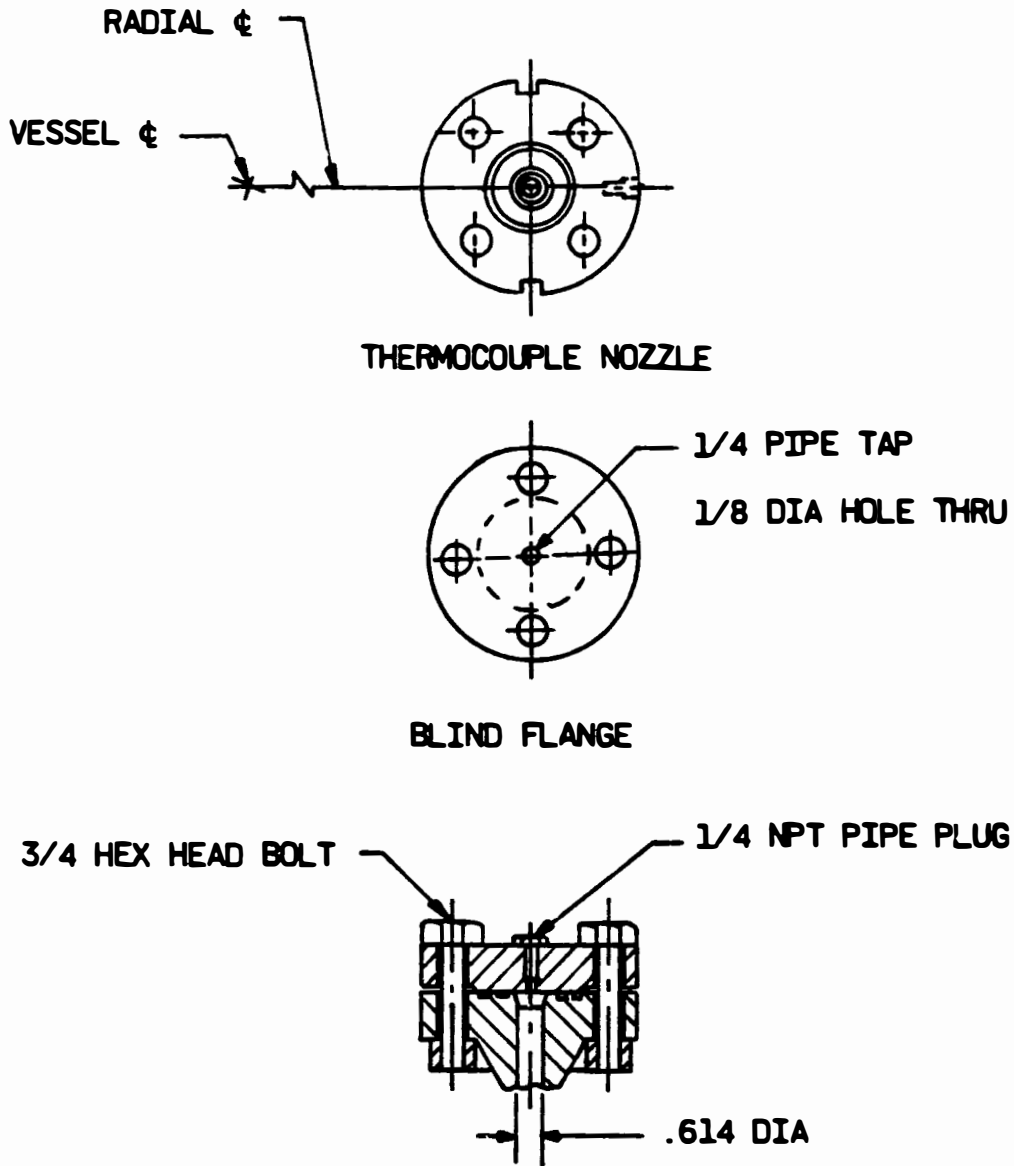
THERMOCOUPLE NOZZLE ASSEMBLY
